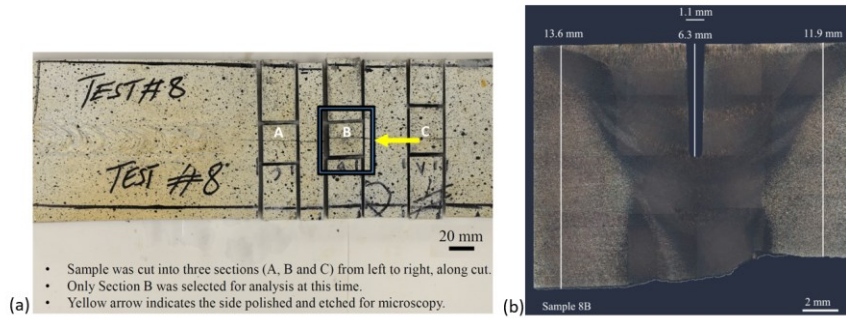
(a) Specimen 8 sample cut into three sections for analysis, (b) Details of flaw dimensions and etched weld microscopy of section B.
